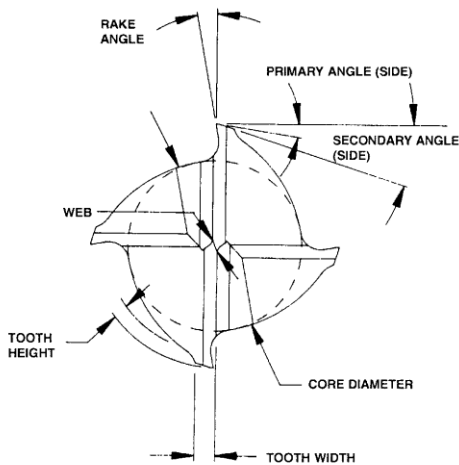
Cutting tool parameters - Angles on an end mill [86]
